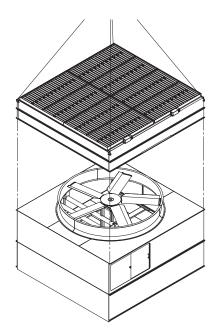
Mating Discharge Hood Damper Section to Coil/Fan Section
